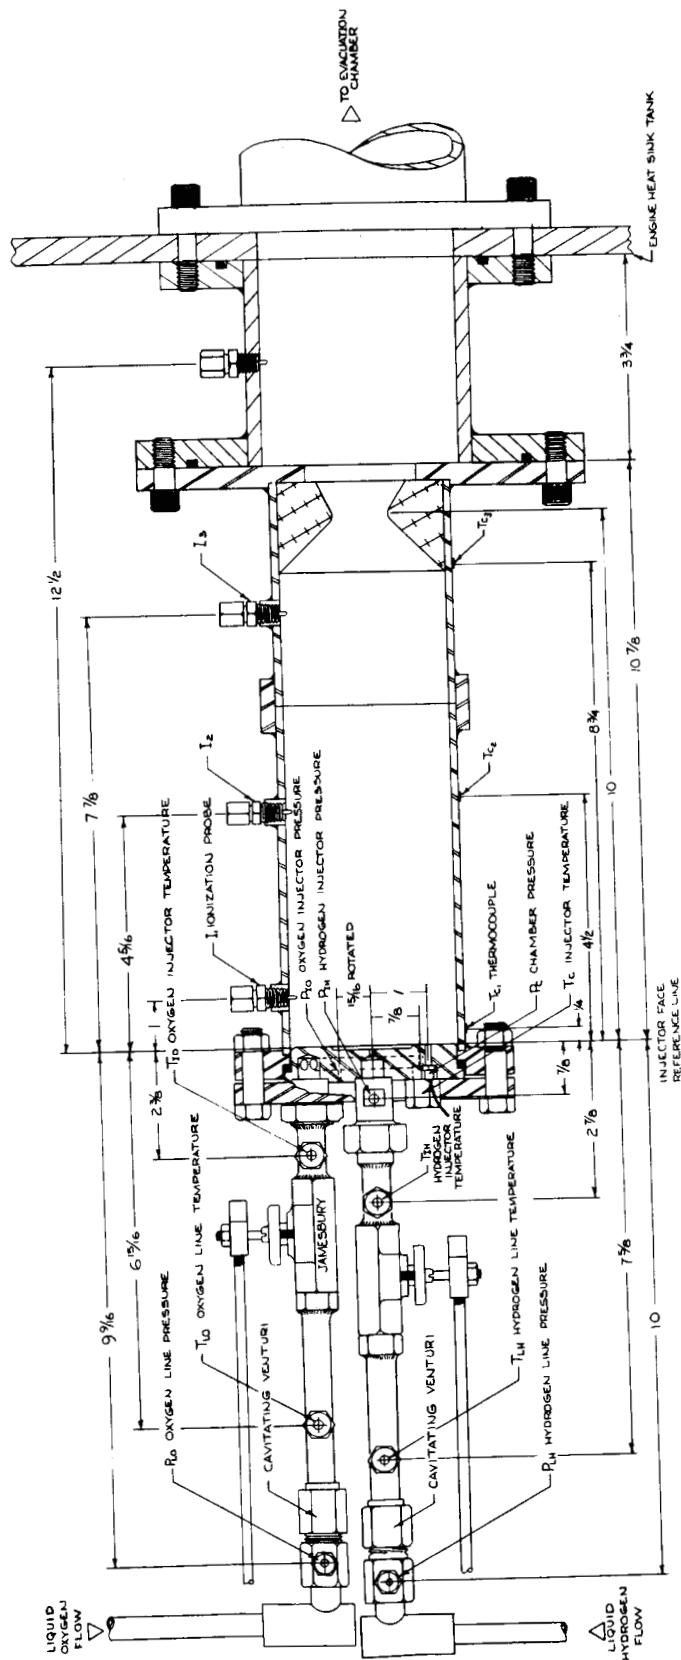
INSTRUMENTED ENGINE ASSEMBLY
